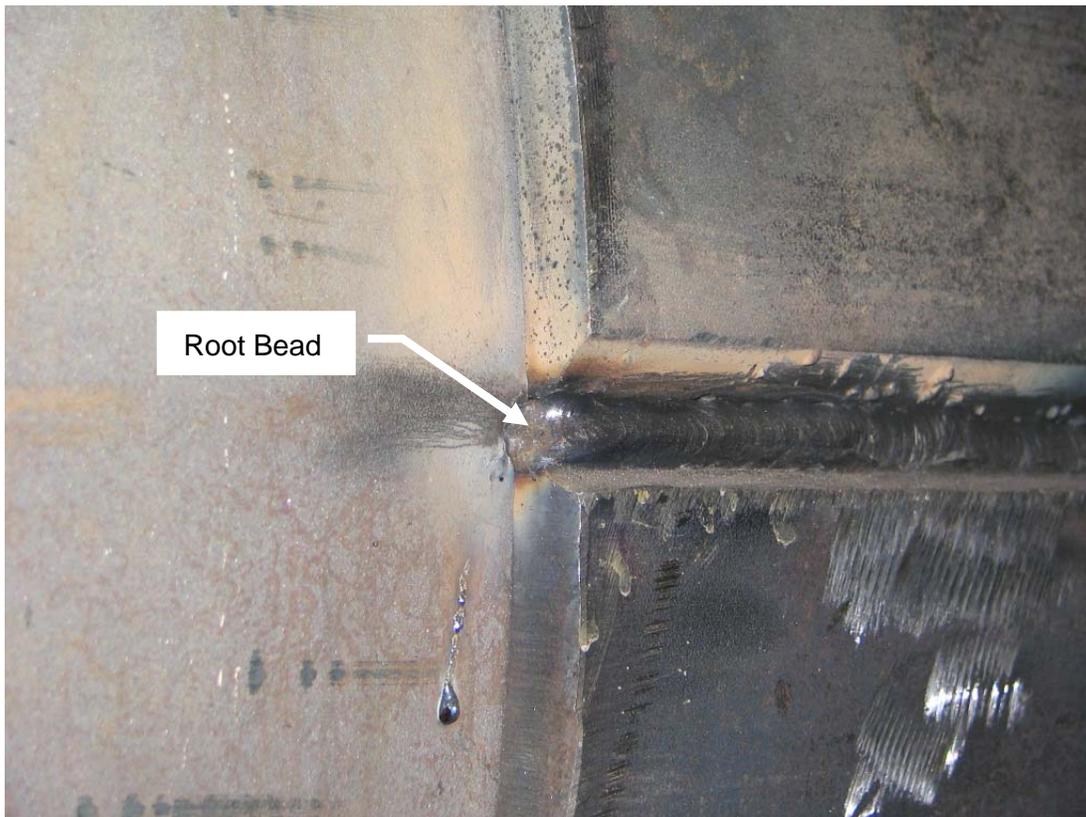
Enlarged View of Pressure-Containing Sleeve Root Bead
